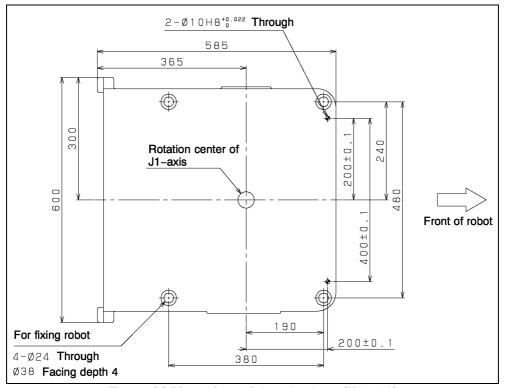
(a) Dimensions of the robot base (M-420iA)
